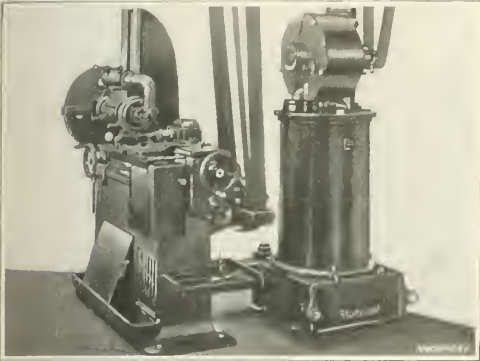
Automatic Gear-cutting Machine with Exhaust System to carry away Chips and Dust
